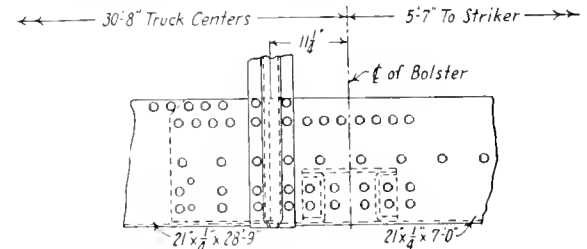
Detail of Splice for Sides of Steel Coal Cars
